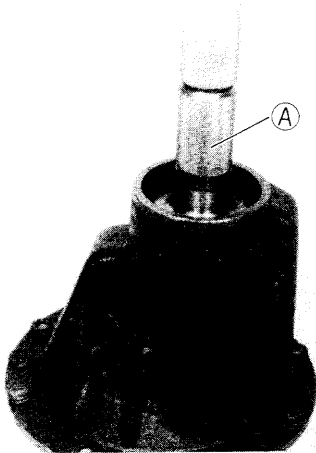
(A) Special tool (Bearing installer 09913-75510)
